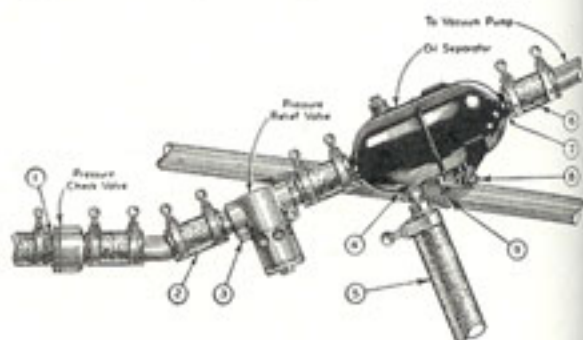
Oil Separator, Pressure Check Valve, and Pressure Relief Valve
